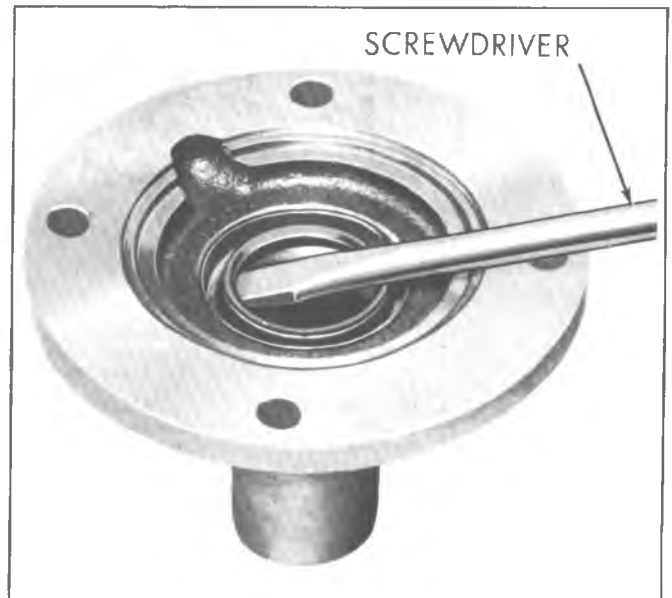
B-13A—Removing Drive Gear Bearing Retainer Seal
